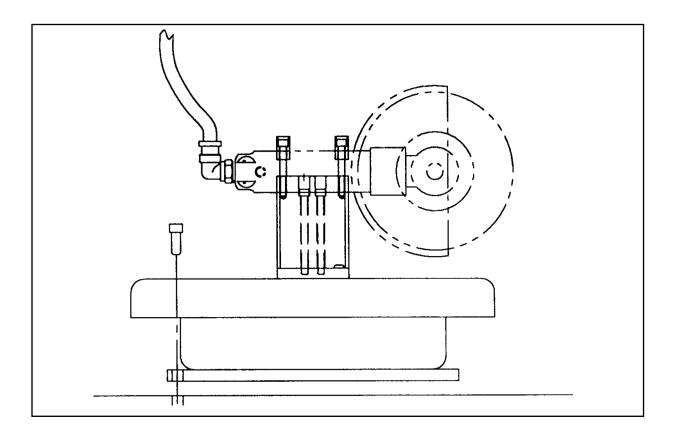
(c) Passive Bench Mounted Device Installation
